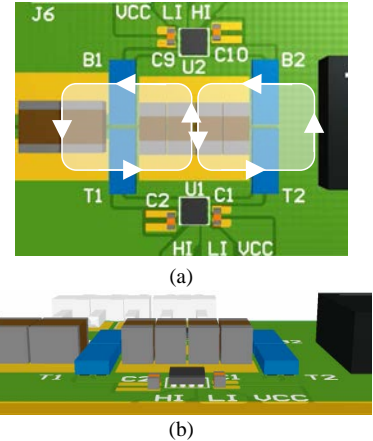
PCB design with discrete ceramic capacitors (a) top view (b) side view
